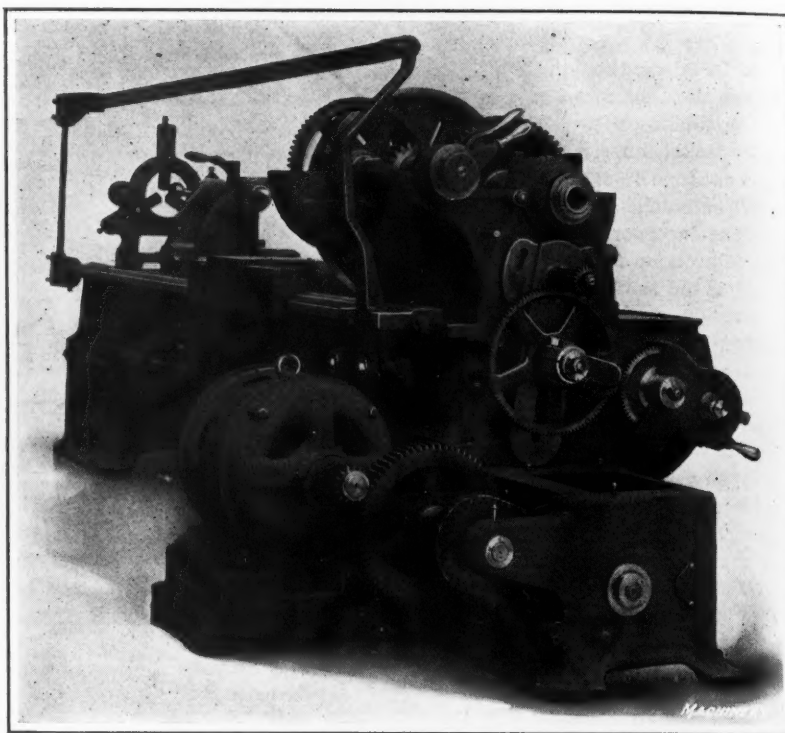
Bradford Geared-head Lathe equipped with Individual Electric Motor Drive
